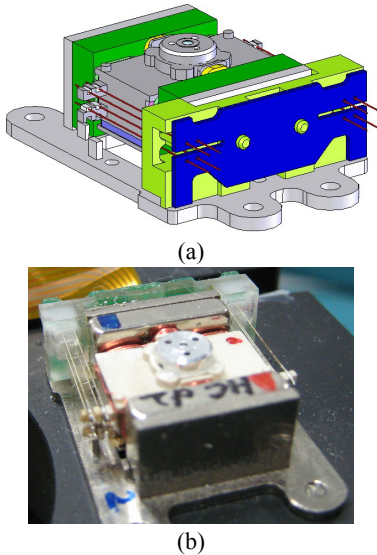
(a) CAD model of the proposed actuator assembly and (b) the manufactured one
